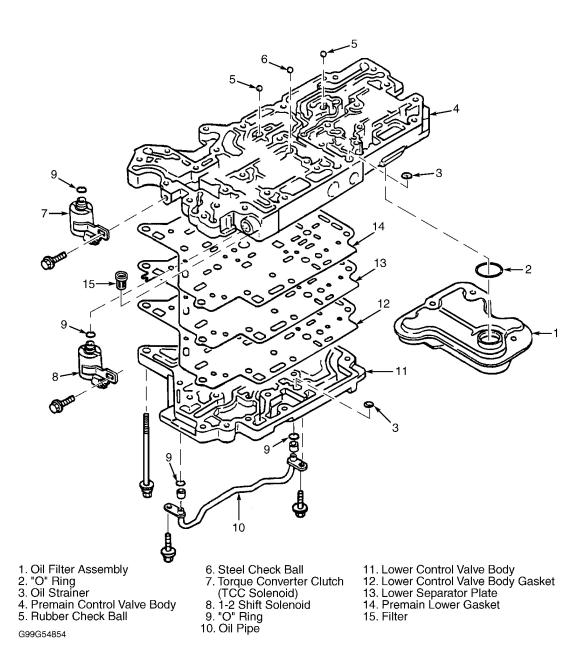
Exploded View Of Premain & Lower Valve Bodies Courtesy of FORD MOTOR CO.
